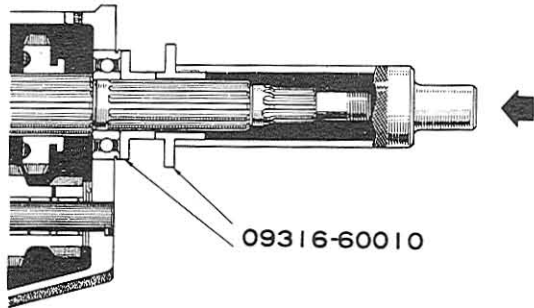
Output Shaft Rear G2390 Bearing Installation
